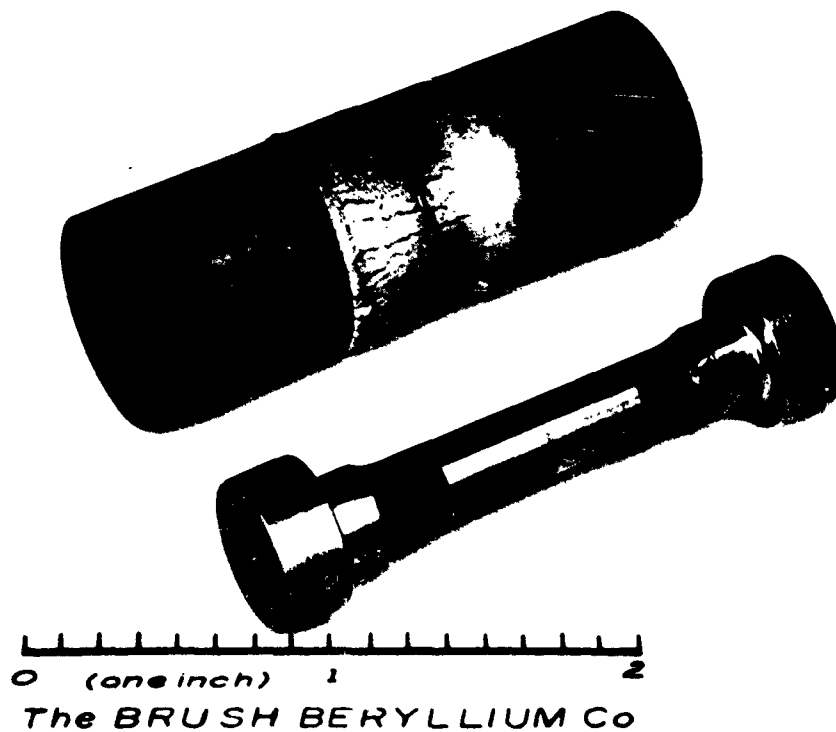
Beryllium rods brazed together with pure silver, showing one specimen as brazed and one after machining to a button-head tensile specimen.
